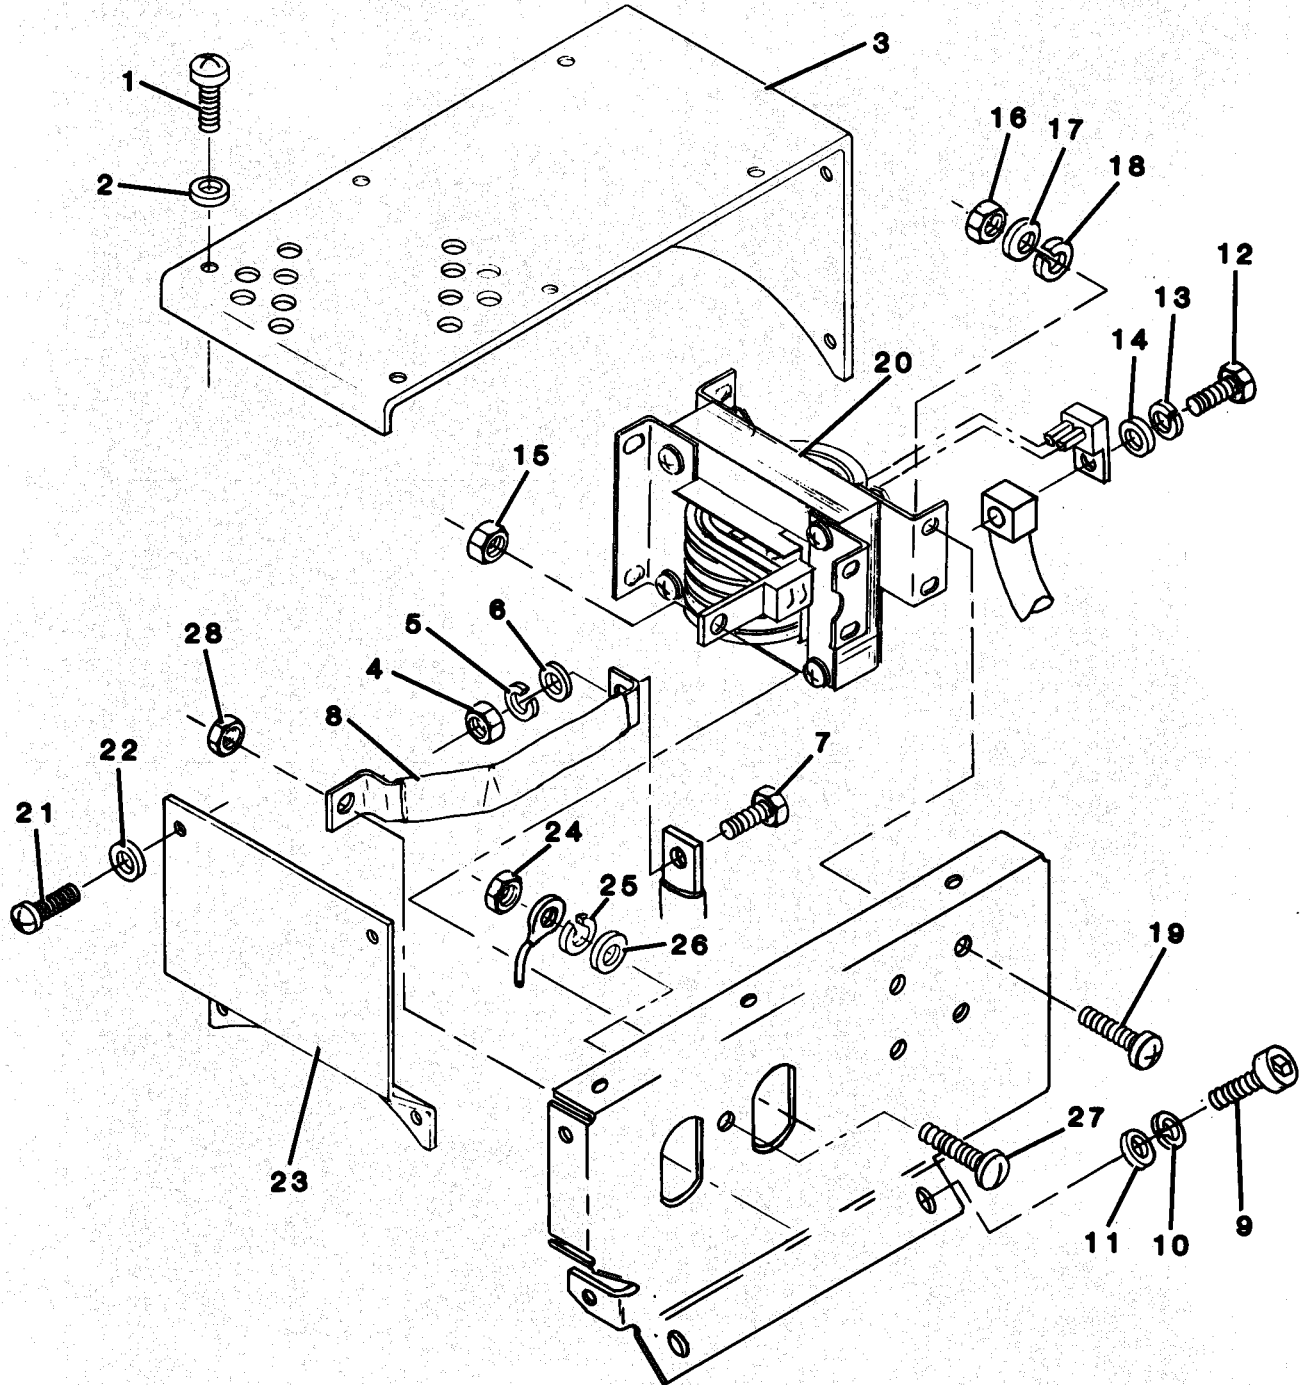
Filter Box Assembly (Sheet 1 of 4)
